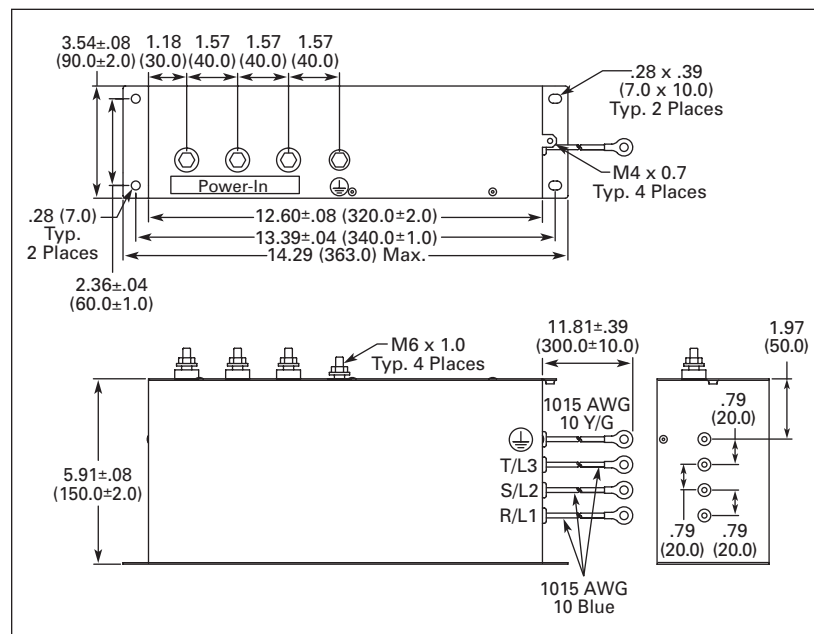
Approximate Dimensions in Inches (mm) — 50TDS4W4C
